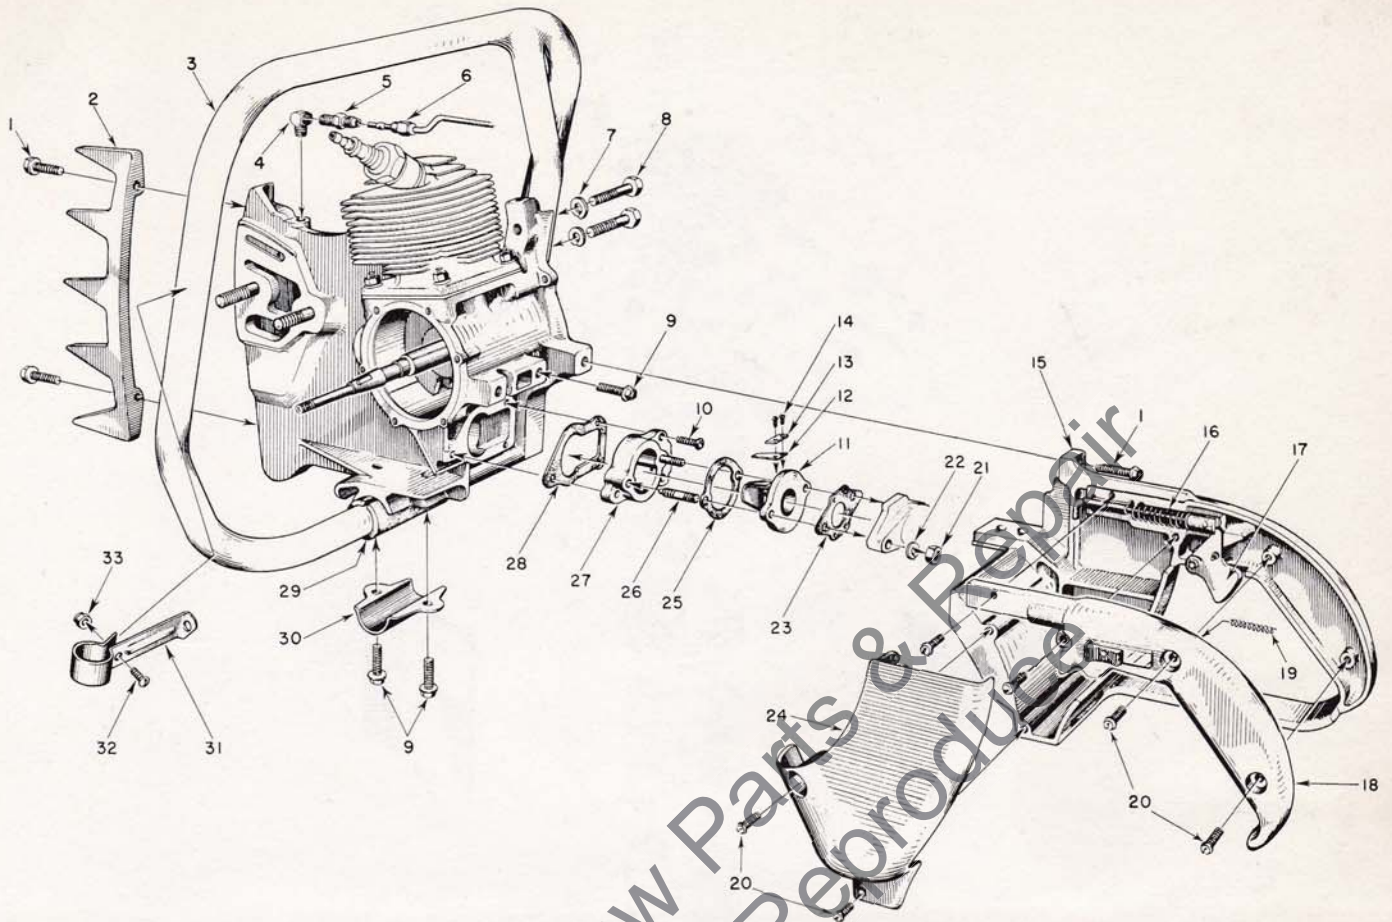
HANDLE, GRIP AND REED VALVE PARTS
